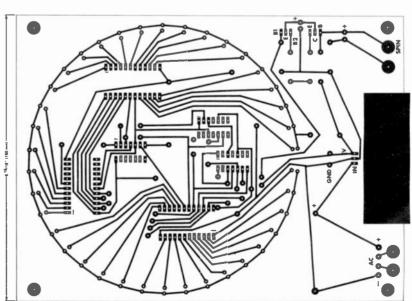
PRINTED CIRCUIT BOARD shown half-size.
